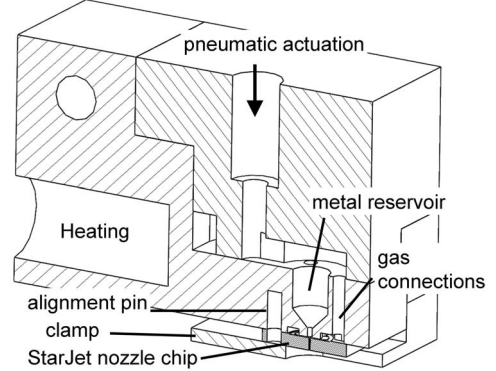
Design of the printhead used to heat and to fluidically connect the nozzle chips.
